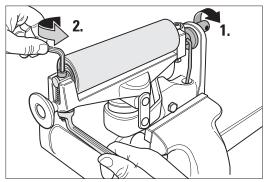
Back out the hexagonal socket head screws while holding on to the lock nuts with the closed mouth wrench. If necessary, turn the crank in the indicated direction.
